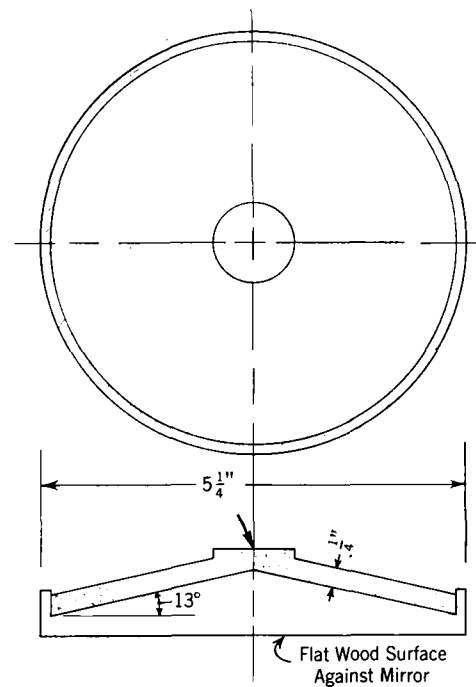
Mirror breaking lens made of a cone of wood backed by $\frac{1}{4}$ in. of Composition C-3 explosive.
